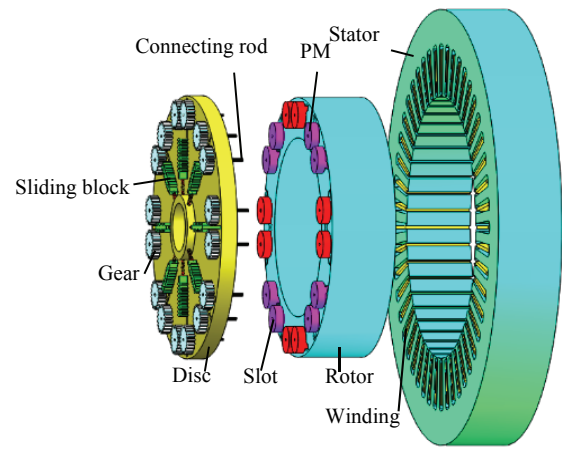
Three-dimensional explosive structure of the ARPMMFVPM.
